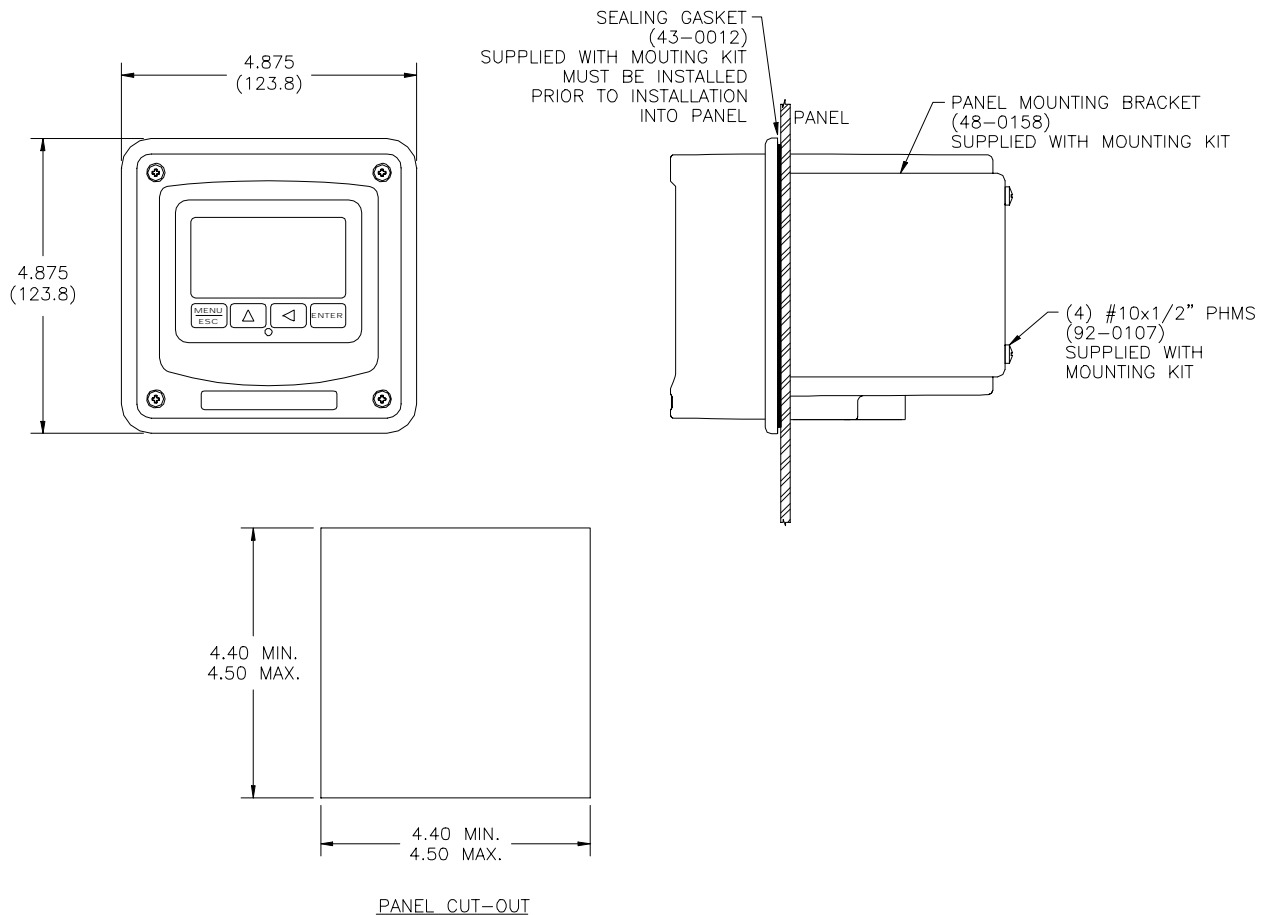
115/230 VAC Panel Mount and Cut-out (ATI-0711)
